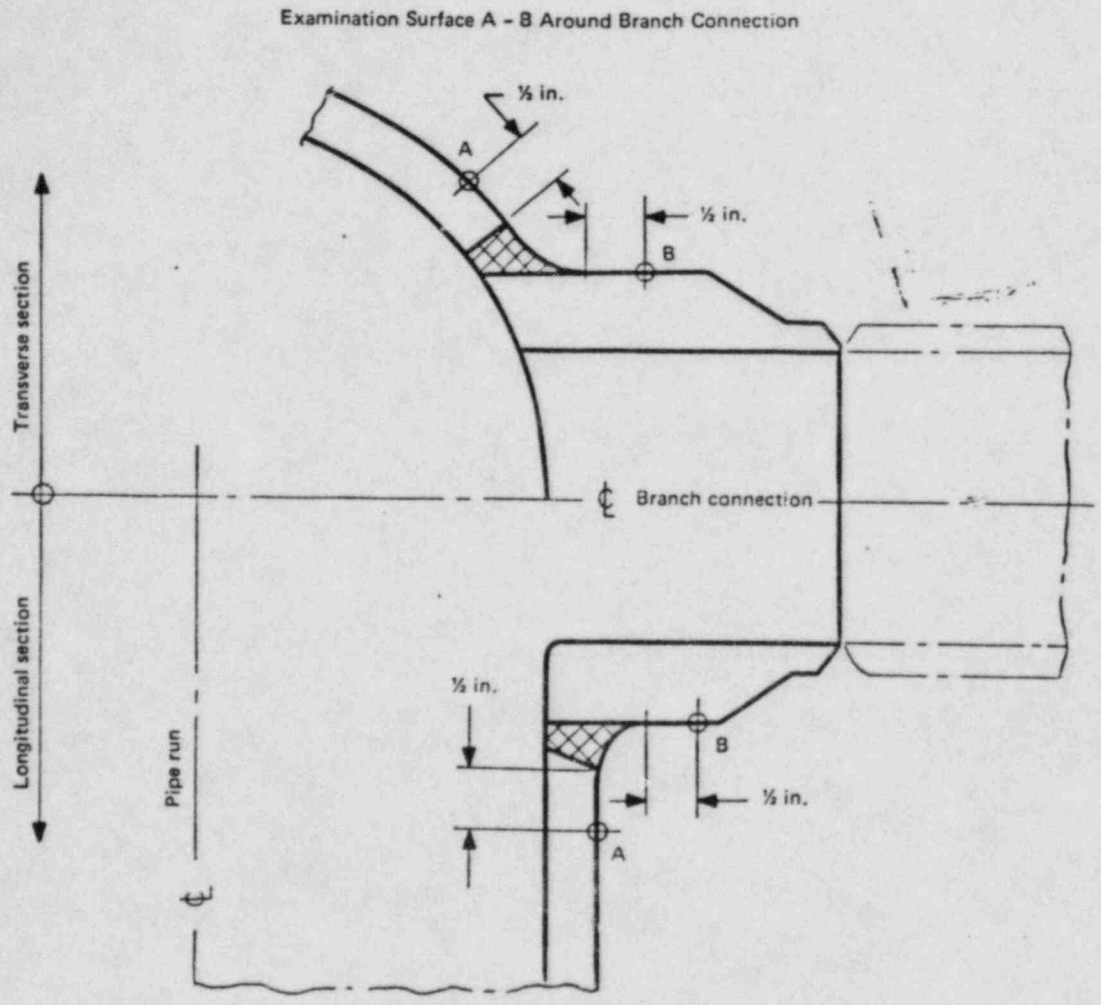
BRANCH CONNECTION WELDS
